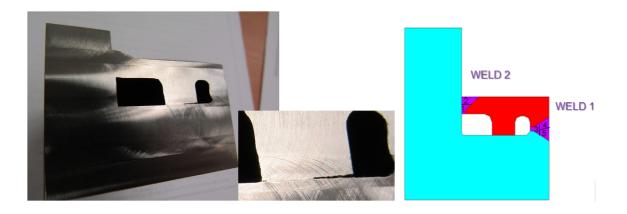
Failure in the brazed joint due to the residual stresses / welding distortions of perimeter seal welds
